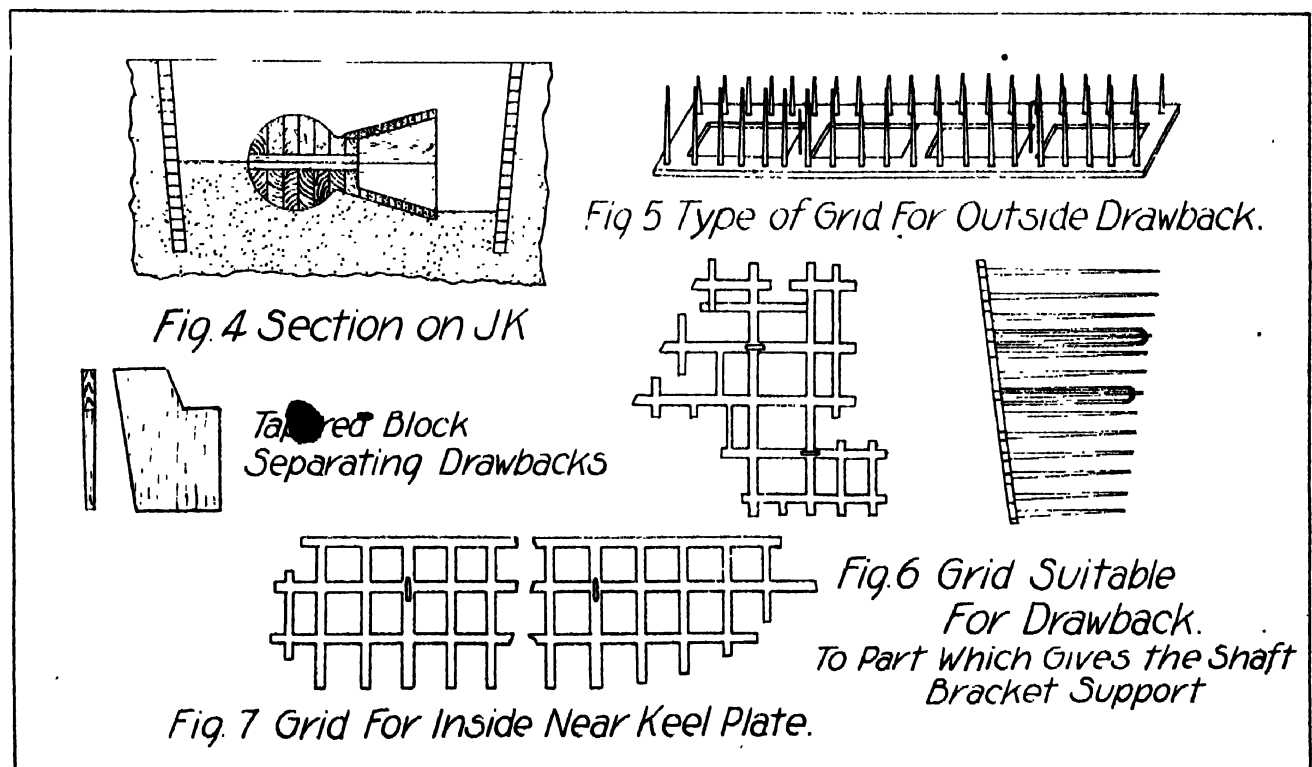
SECTION AT J K FIG. 3 FIG. 5—GRID FOR OUTSIDE DRAWBACKS FIG. 6—DRAWBACK GRID FOR SHAFT BRACKET SUPPORT FIG. 7 GRID FOR INSIDE NEAR KEEL PLATE
